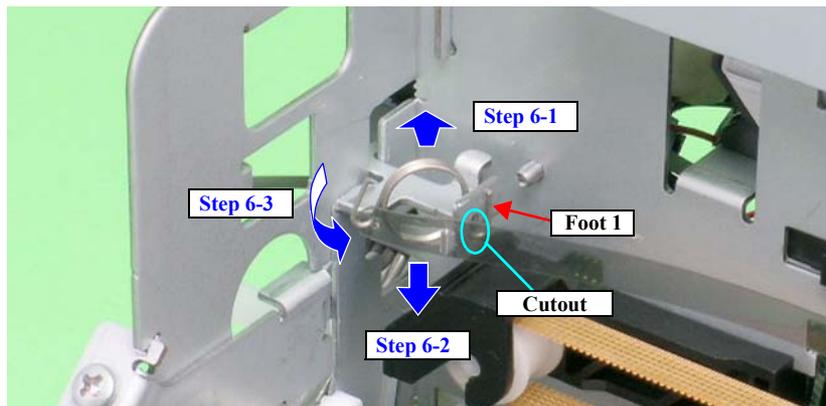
Removing the Torsion Spring 24.7 (2)
